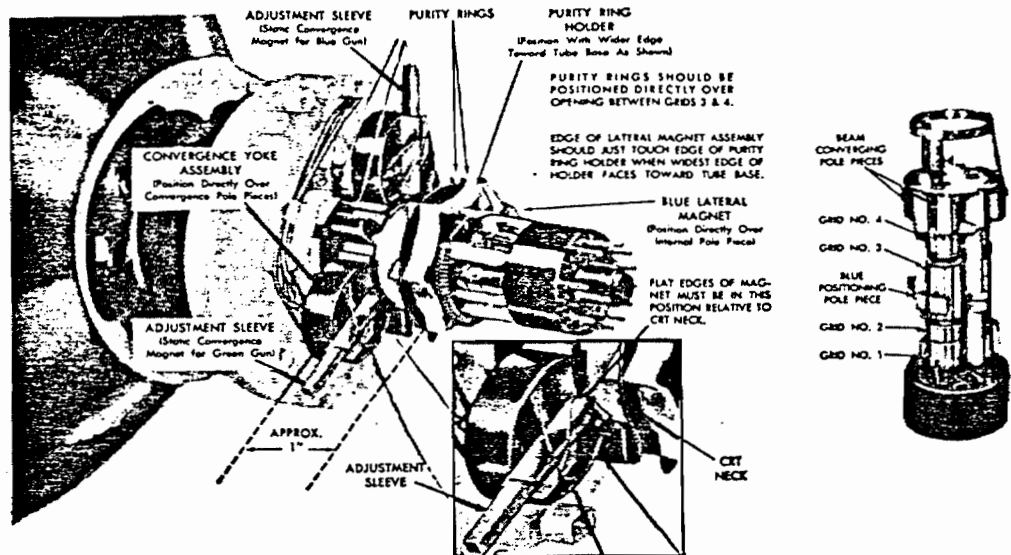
Rear View of Picture Tube, Showing Correct Positioning of Neck Components
